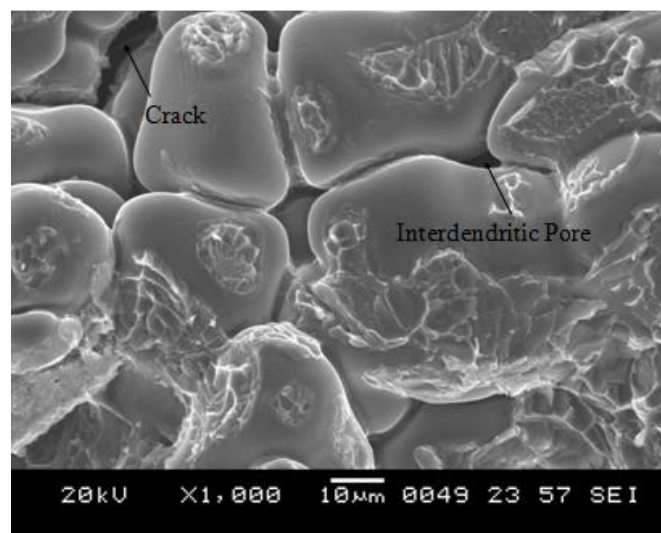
Fractograph of cast aluminum rod fractured during third pass
